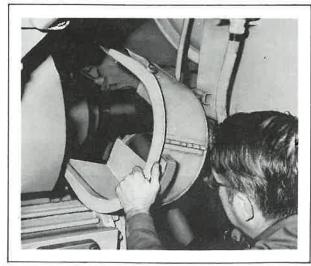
LONG SHAFT ENGINE TO COMPRESSOR GUARD.
